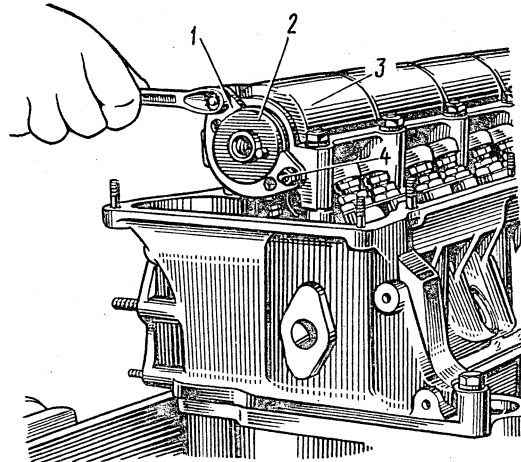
Removing the Camshaft Thrust Flange: 1 - thrust flange; 2 - camshaft; 3 - bearing housing; 4 - thrust flange fastening stud
